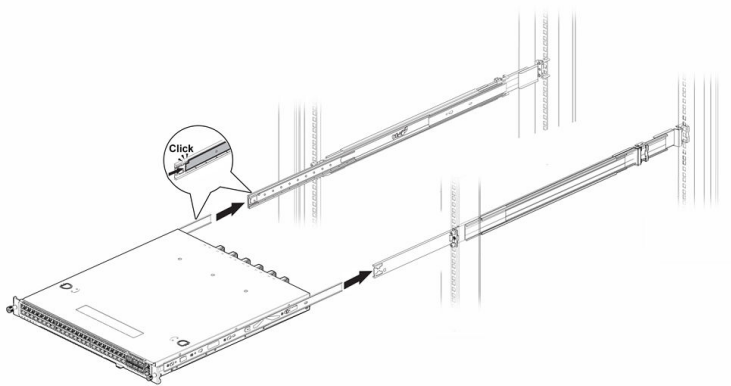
Attaching the Slider Assembly to the Rear Rack Post
